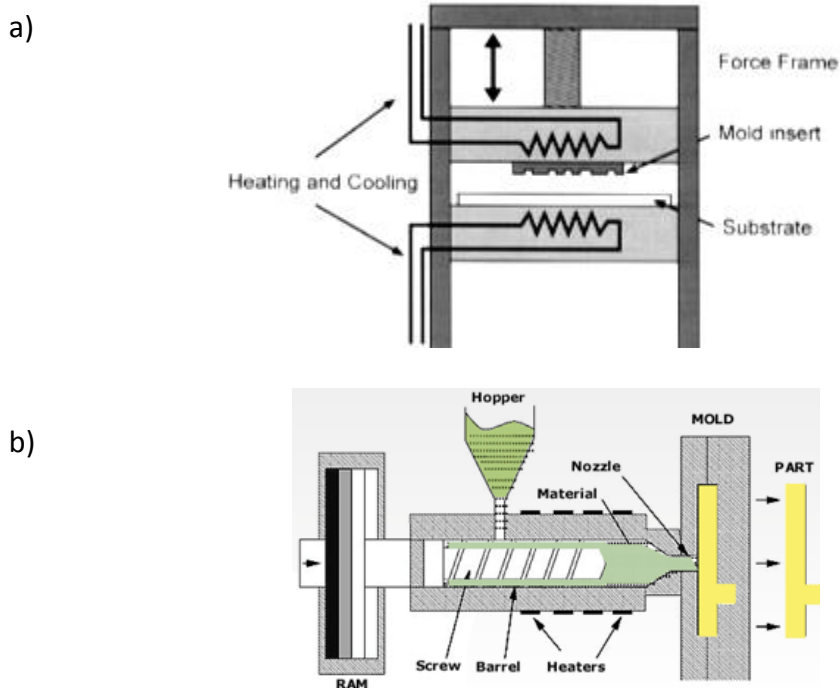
An example of a thermal embossing(a) and injection moulding (b) setup [119].
